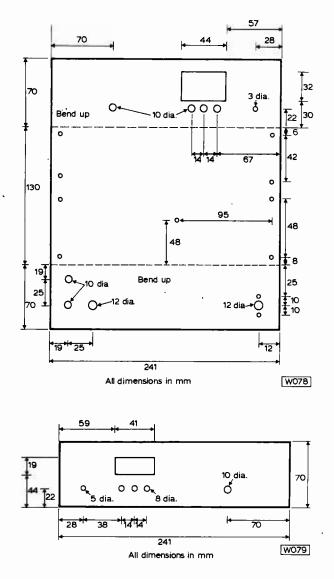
Drilling details for the chassis (top) and point panel (bottom). Materials can be 18 s.w.g. aluminium.
